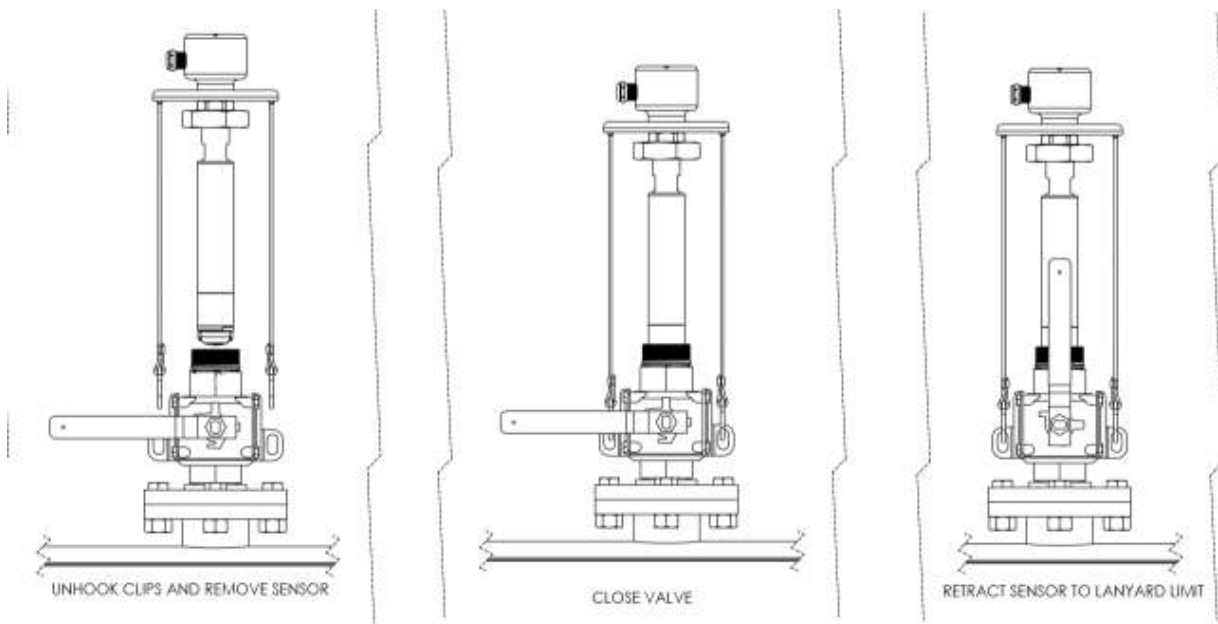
Remove sensor from Hot Tap Valve (Sequence Right to Left for removal)
